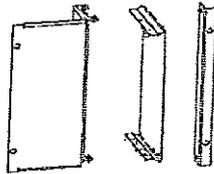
6U 1/2 19" housing + RHGS 6 mounting brackets
